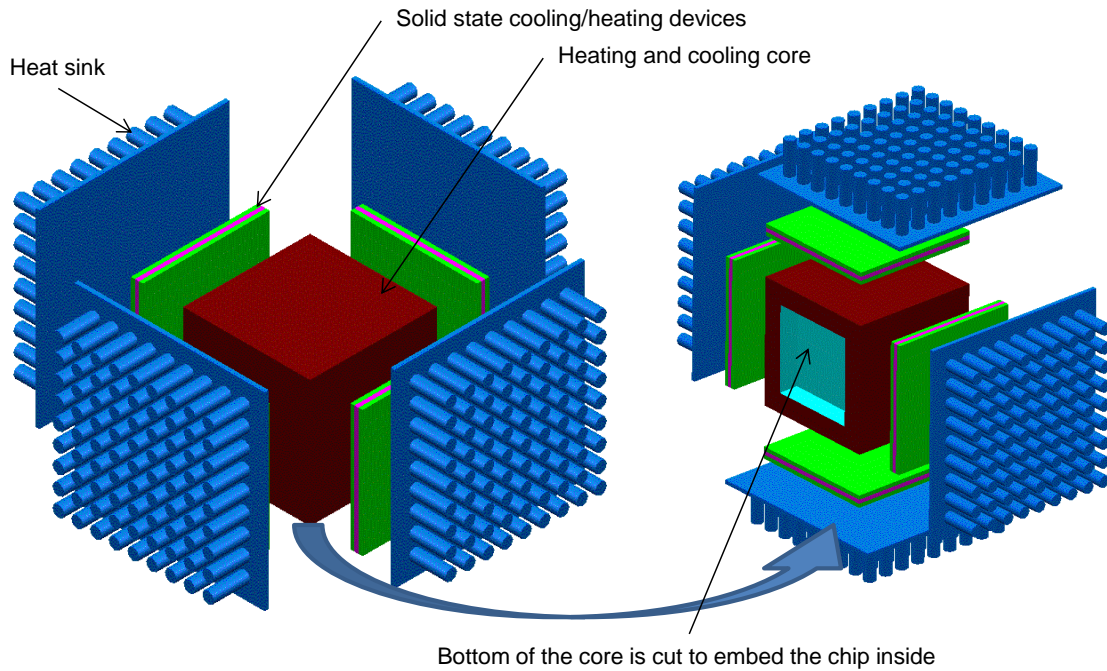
Exploded view of the Multidimensional Thermal Cycling System (MTCS)
